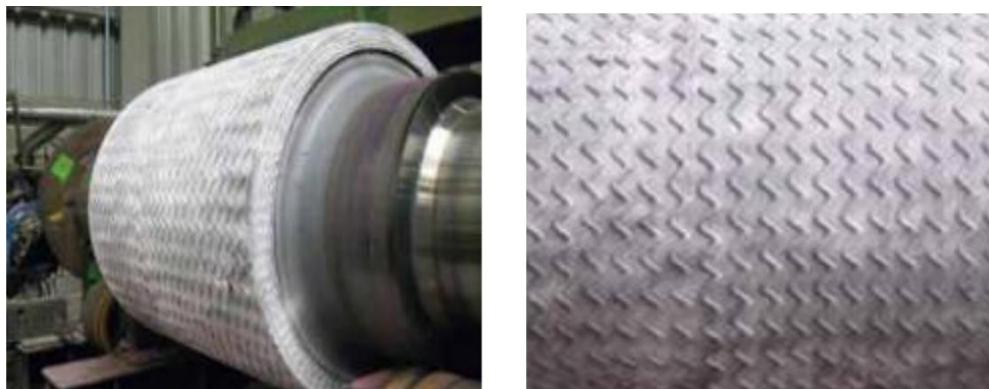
Bead pattern with different side (Courtesy www.welding-alloys.com)
